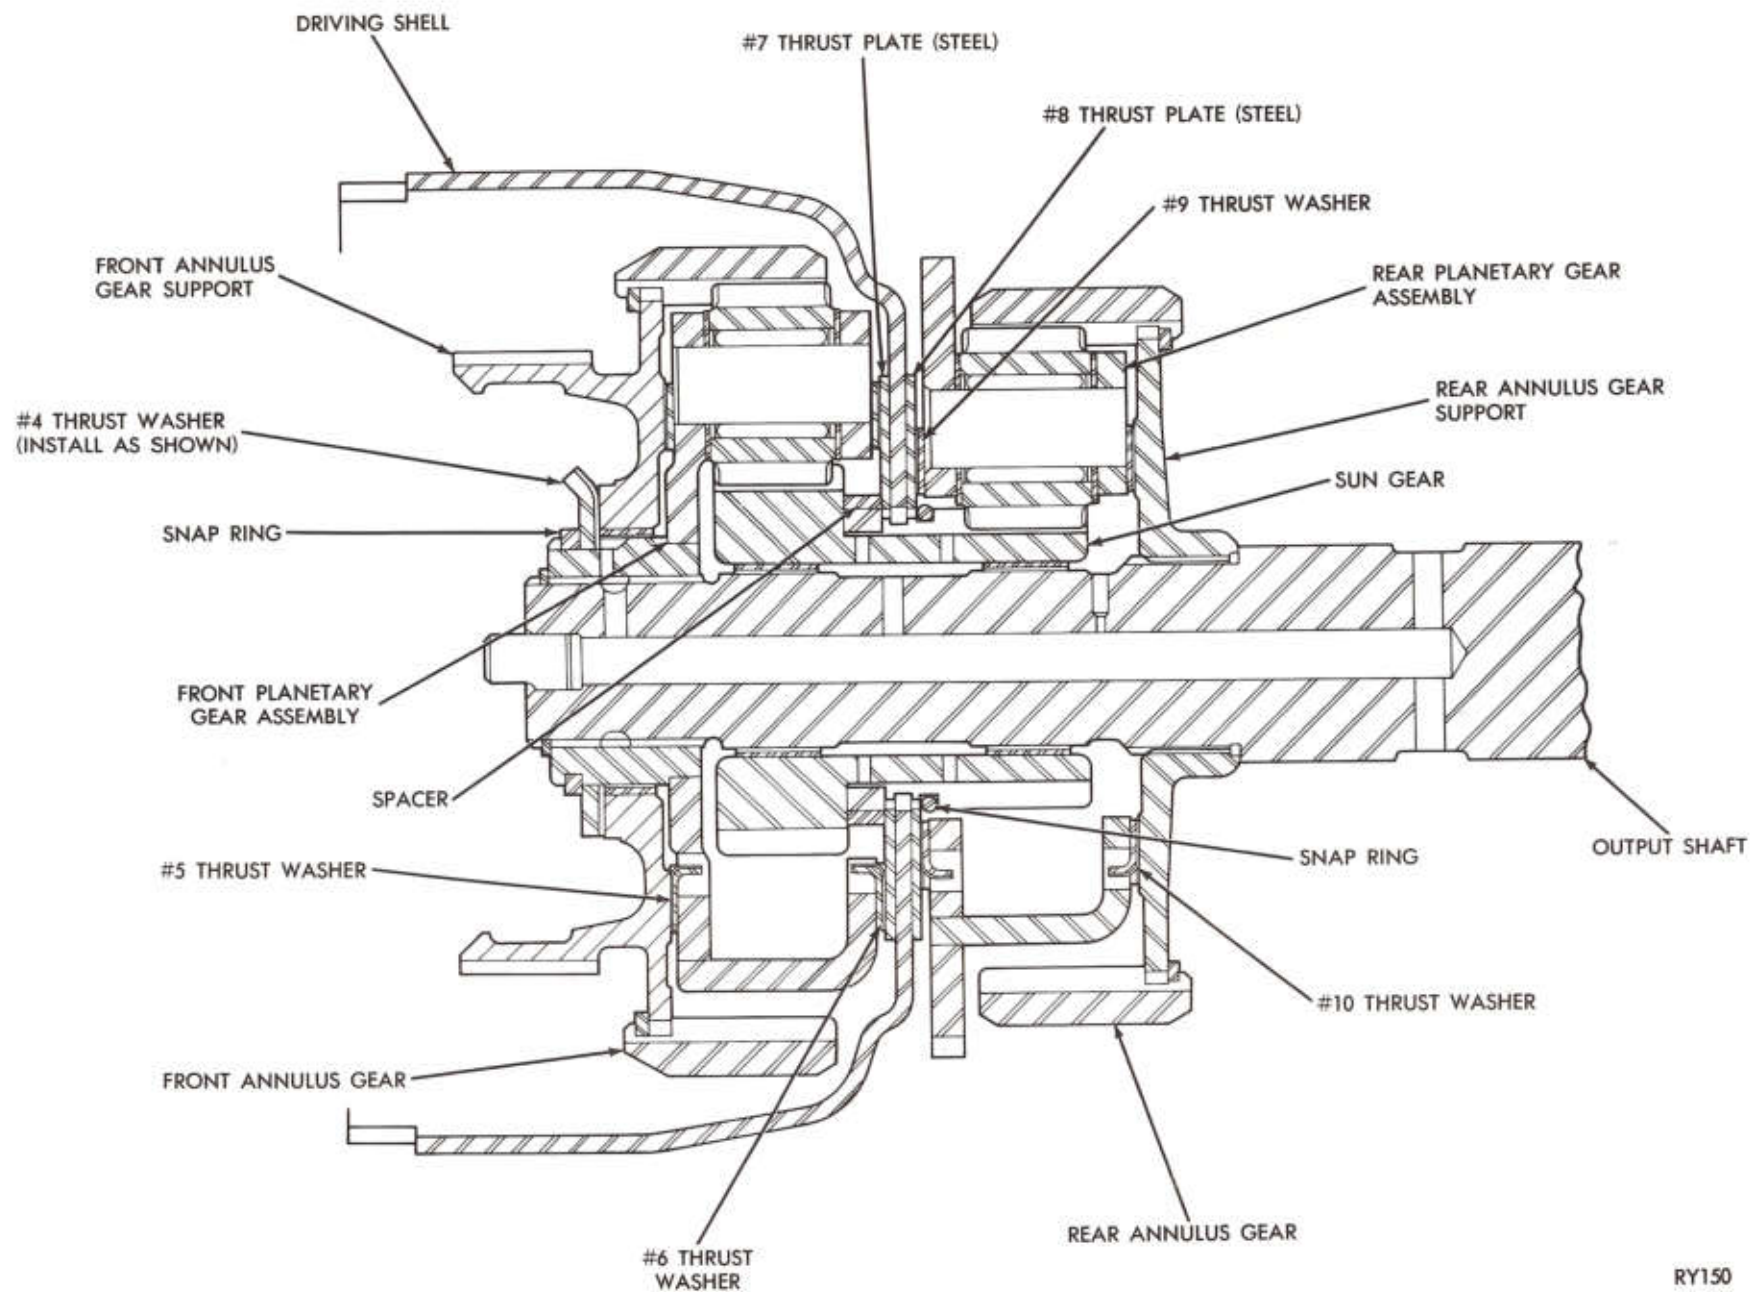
Wide-Ratio Planetary Gears Assembly (A-904T and A-999)
